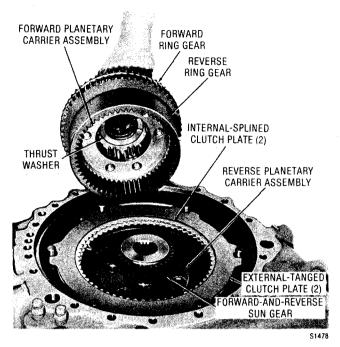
Installing forward planetary carrier assembly and attached parts (TRT-3)
